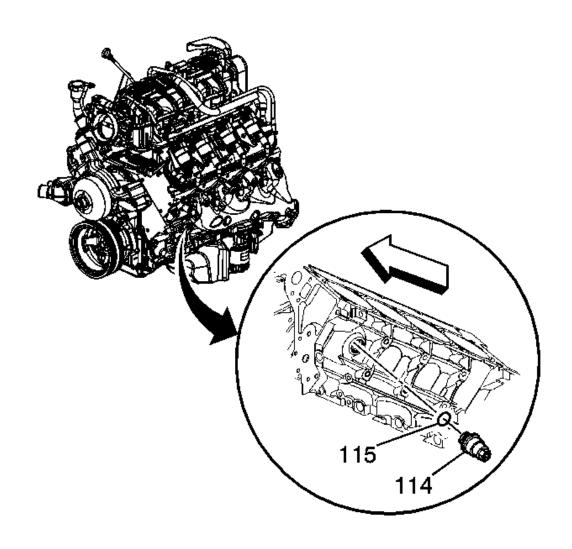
View Of Engine Block Coolant Heater & Washer Courtesy of GENERAL MOTORS CORP.
